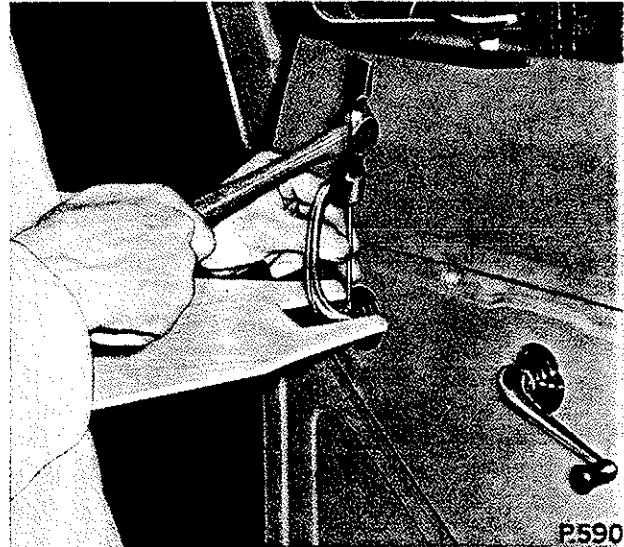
Tapping out the interior door handle pin to remove the door handle
